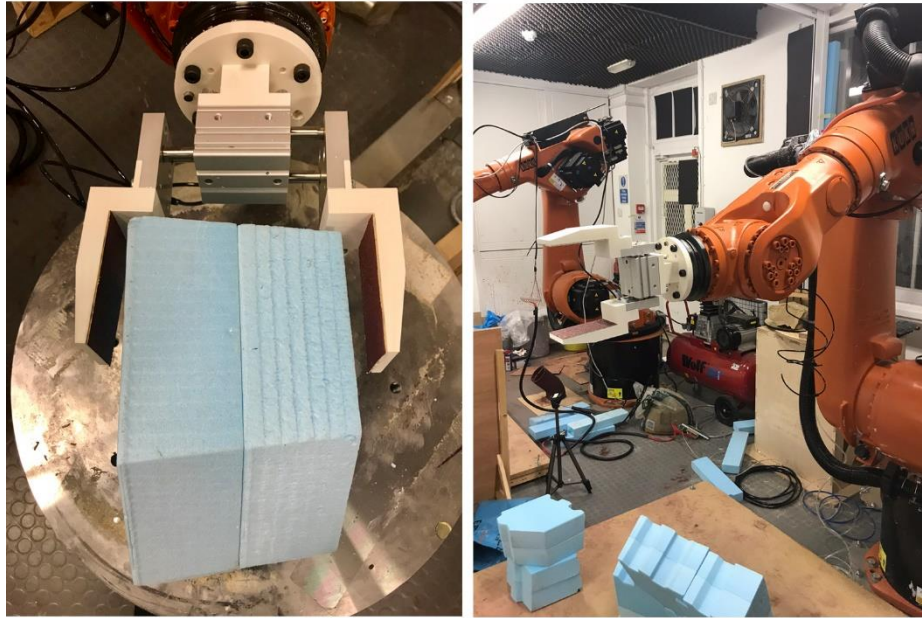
‘Pick’ gripper orientation (left), starting ‘0’ position of the assembly (right)
